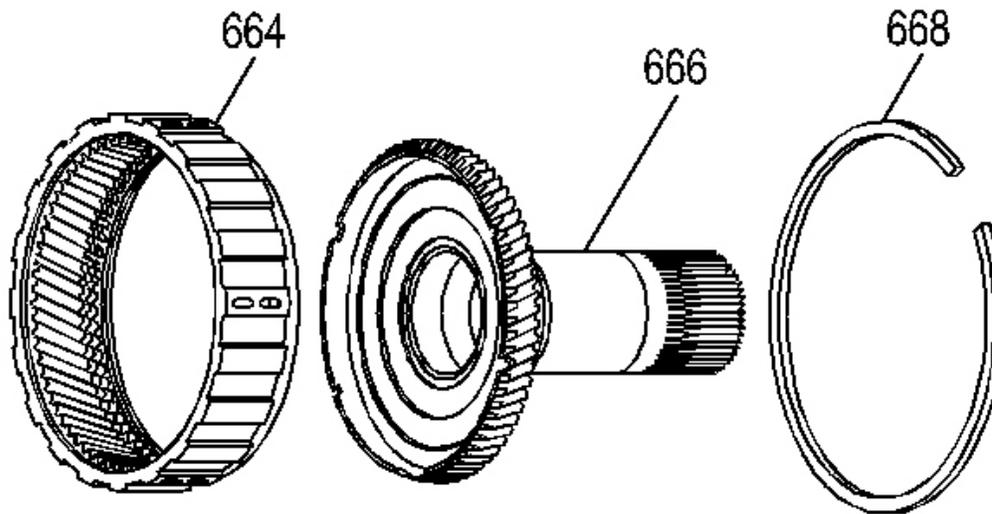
Removing Reaction Carrier Shaft/Internal Gear Retainer & Reaction Carrier Shaft
